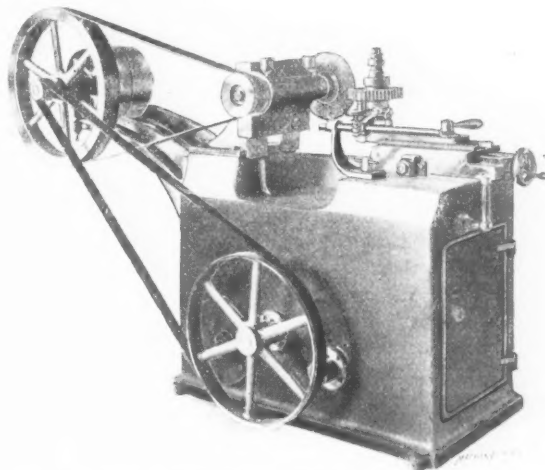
The Upton & Gilman Machine for Finishing the Teeth of Cast Gears by grinding with a Formed Wheel.
